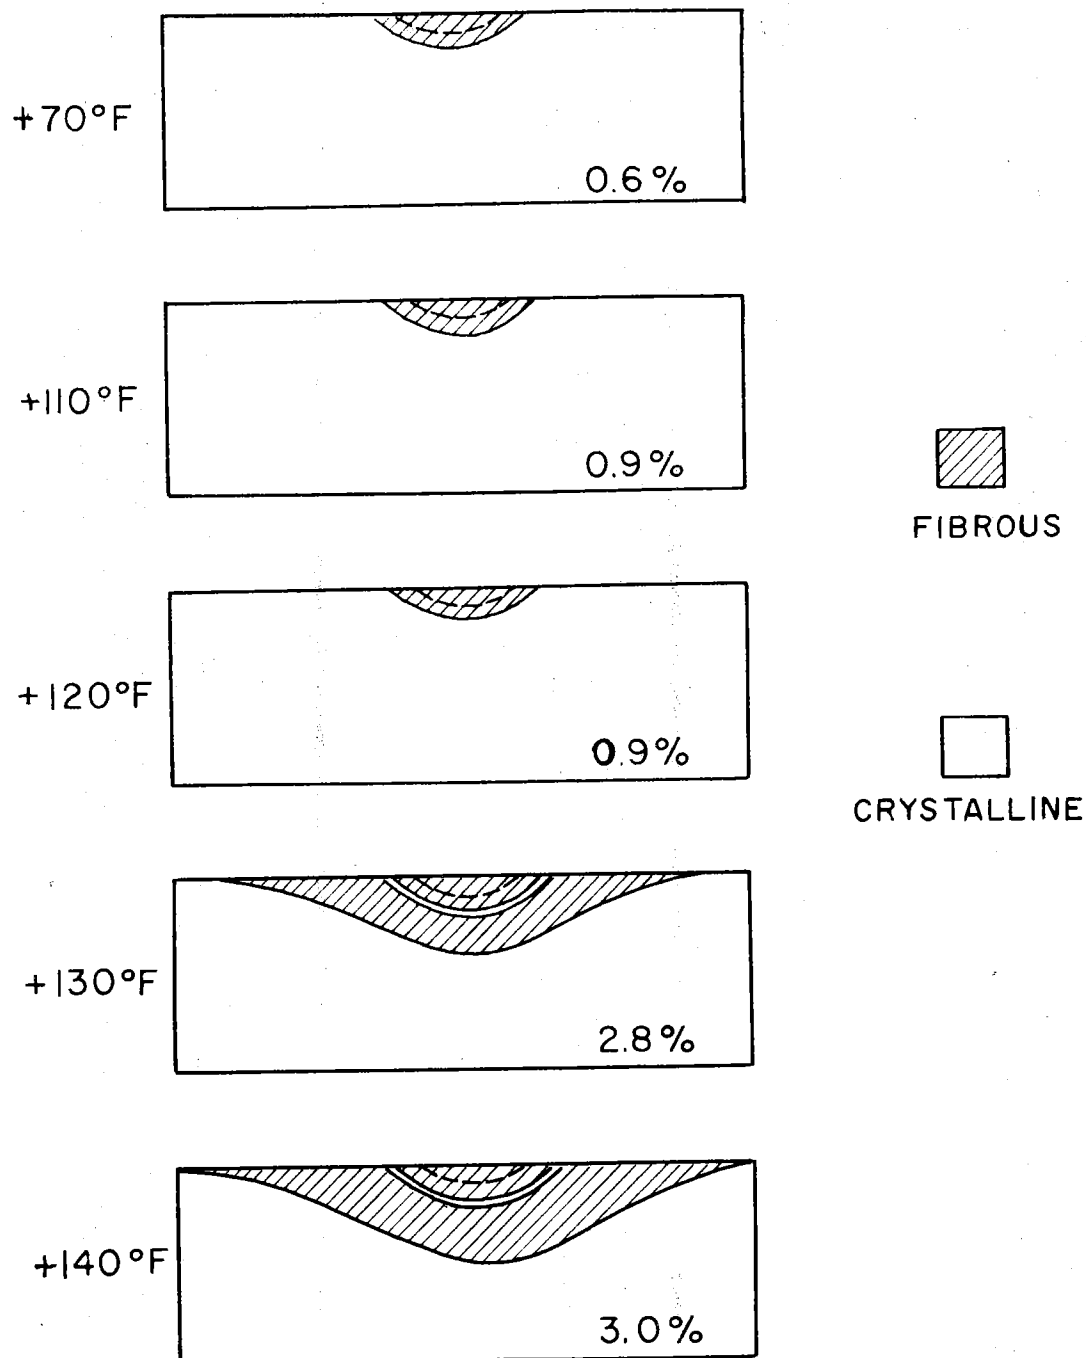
Fracture Behavior of Kinzel Specimens of 1" A-302 Steel, Welded.
